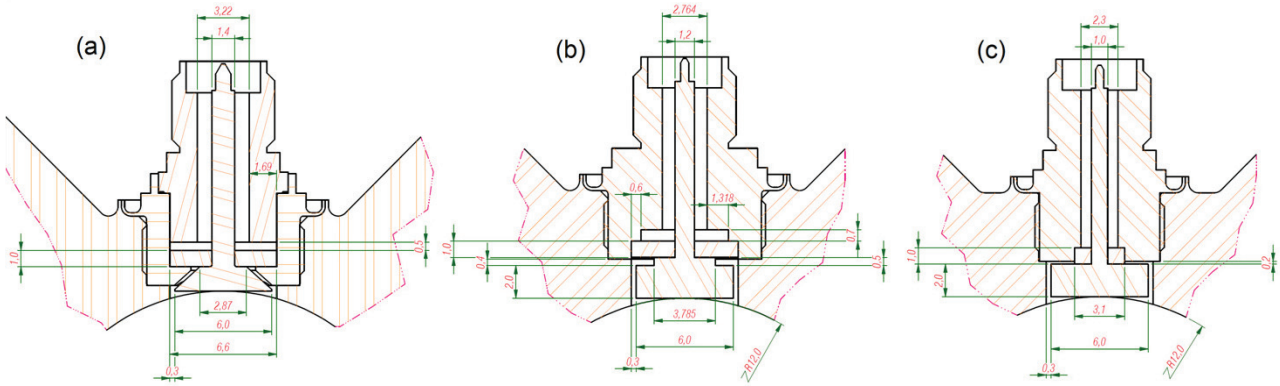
Engineering drawing of the BPM Buttons for: a) Bell-Shaped BPM Button. b) Step-Shaped BPM Button. c) Flat BPM Button.
